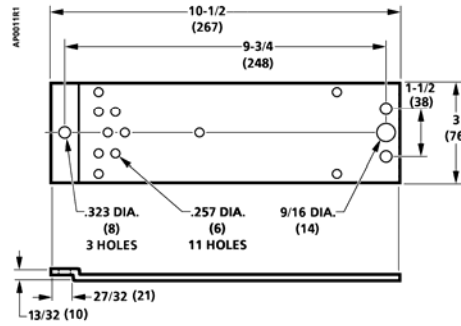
Extended Shaft Mounting Bracket Dimensions. Dimensions are in Inches (Millimeters).
